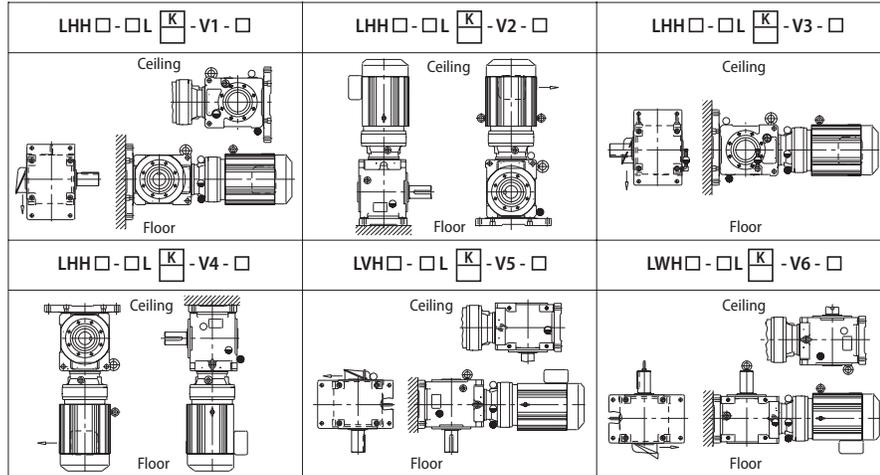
Double Extended Solid Output Shaft (T) – Mounting Foot Side
